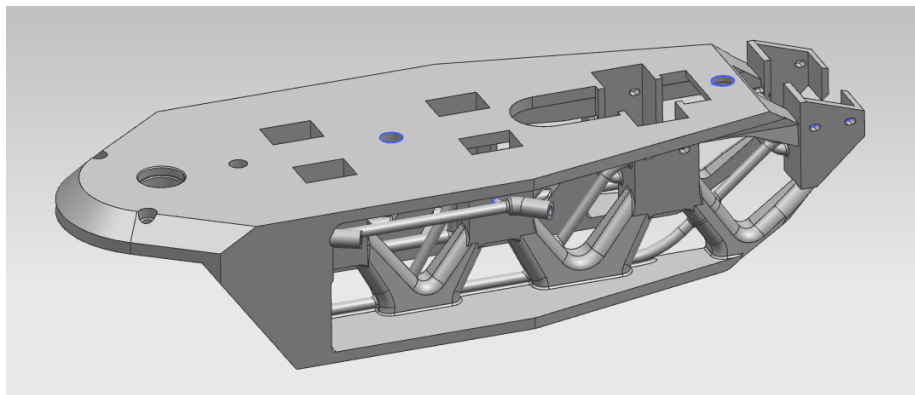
This figure shows how the length and outer size of the part has been reduced to fit in the build volume of NTNU's additive manufacturing machine.
